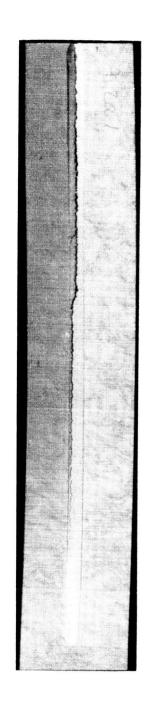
Typical Hot Tear on Bead-on-Plate GTA Weld on 0.030 Inch Arc Cast W-25Re-30Mo Alloy Sheet
